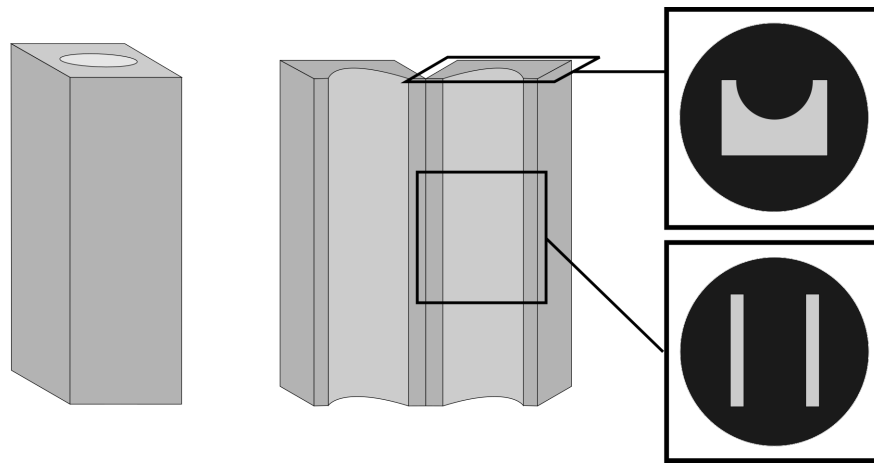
Sectioning procedure to produce two cross-sections from a machined hole, a radial view (upper) and an axial view (lower)
